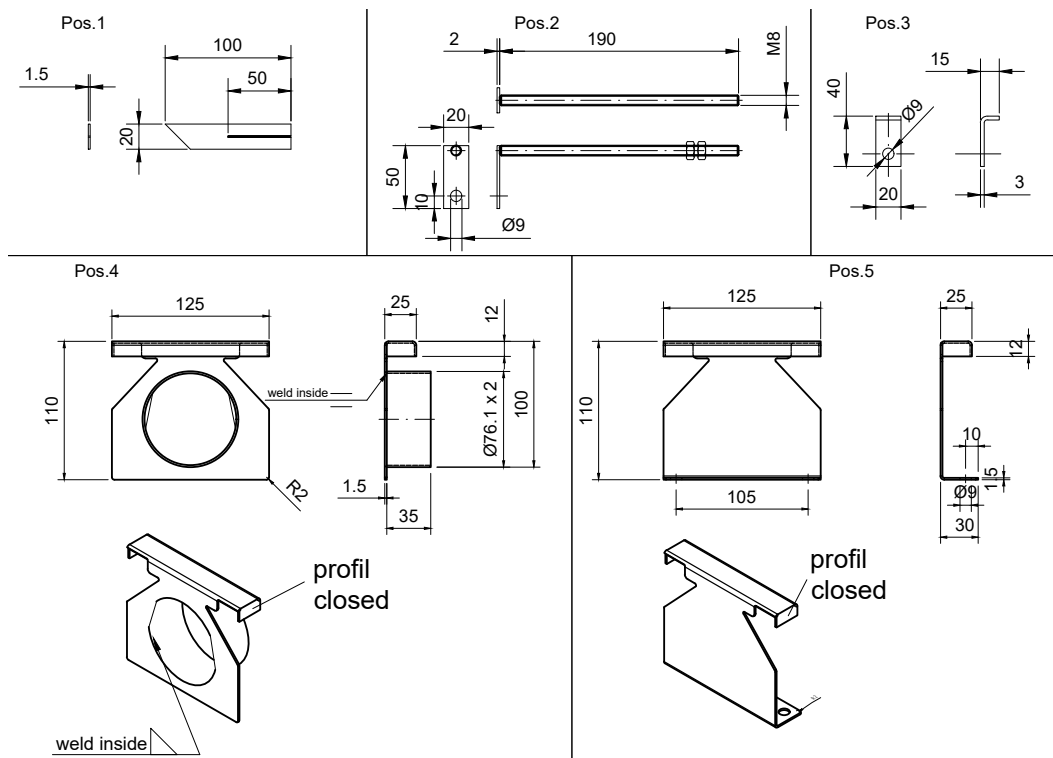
KORA drawing with improvement (welding explanation) (Source: Own drawing)
